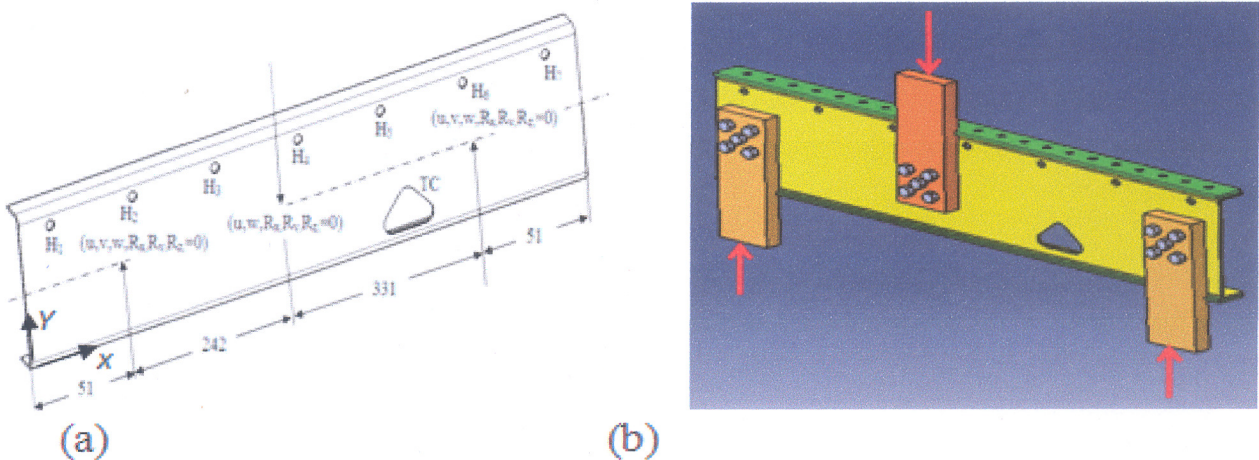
(a) Details of Load and Boundary Conditions, (b) Load Bracket Assembly Employed for Testing and Modeling
